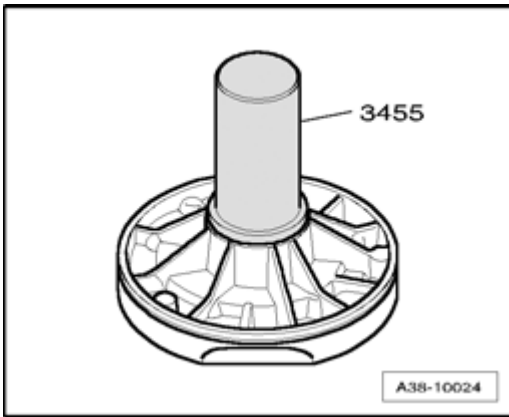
Driving In New Shaft Seal To Stop Using Thrust Piece 3455
